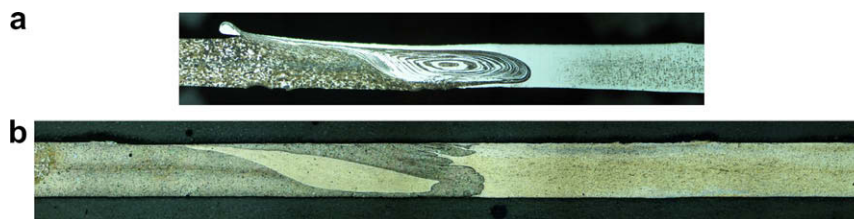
Transverse cross-sections of dissimilar welds between alloys AA 5182-H111 (on the left) and AA 6016-T4 (on the right), welded with Tool 1 (a) and Tool 2 (b).
